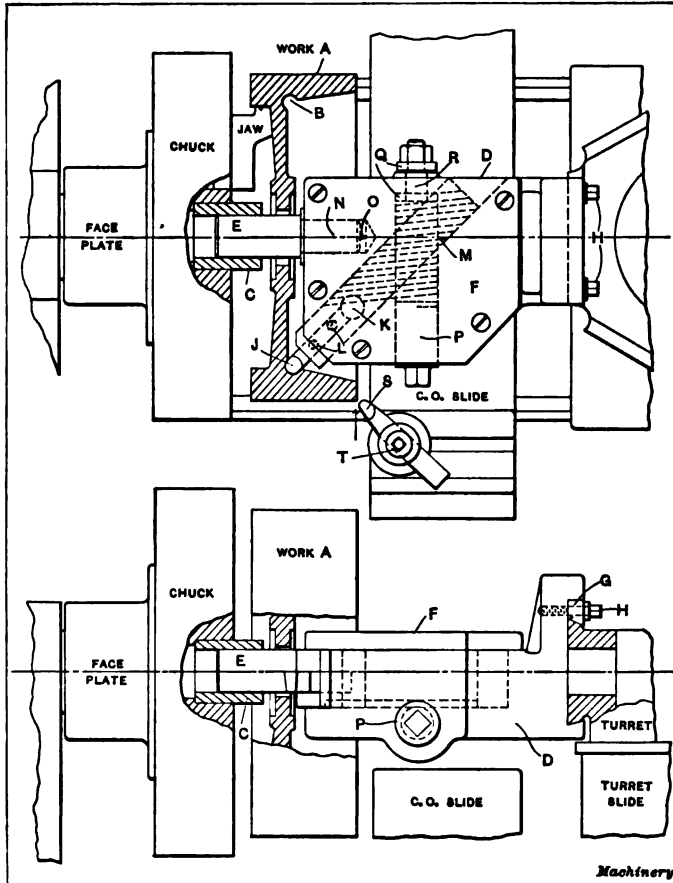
A Recessing Tool used in machining an Automobile Flywheel
